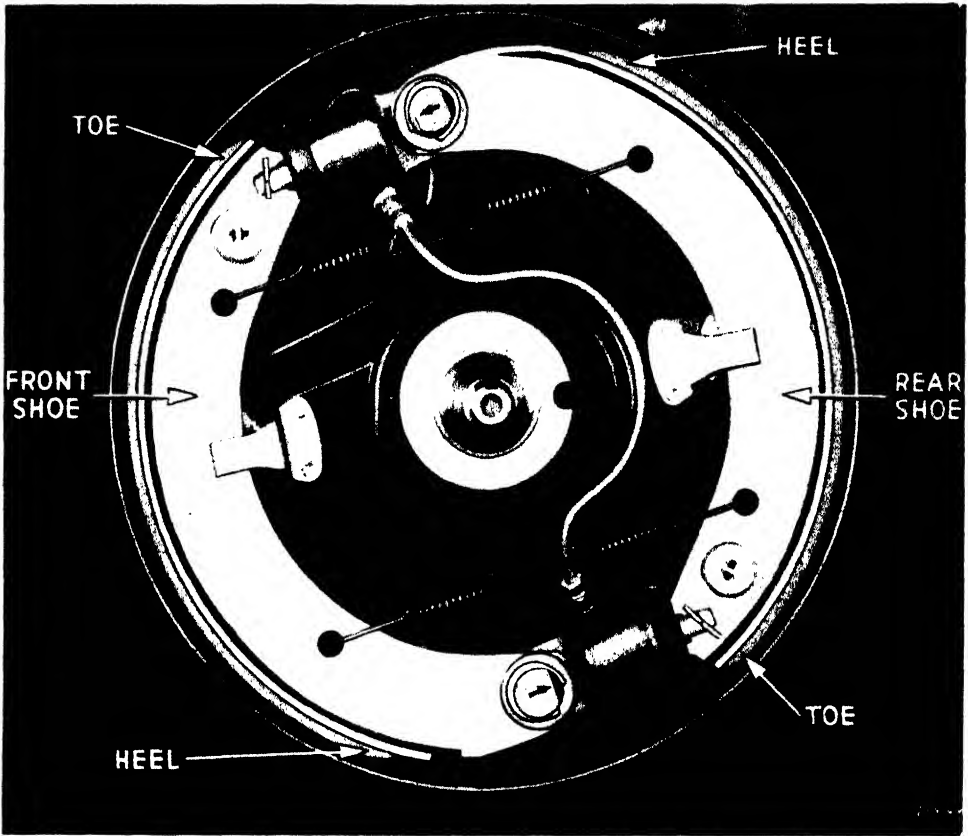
BRAKE SHOES AND HYDRAULIC CYLINDERS. (Courtesy, Chrysler Corporation.)
